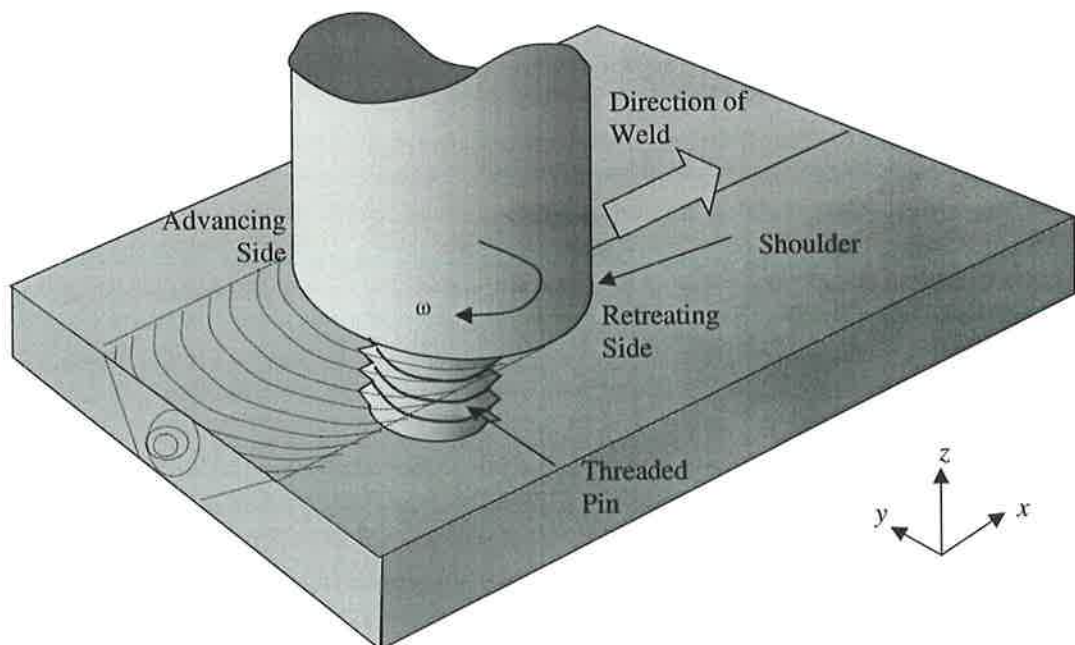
Schematic of the Friction Stir Weld
